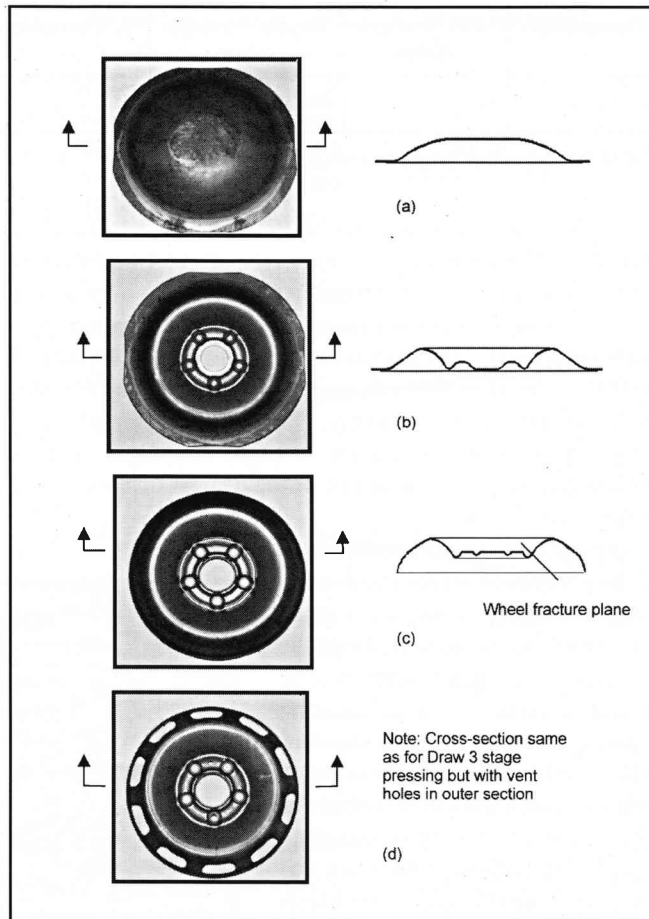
Production stages of a wheel; a) Draw 1 stage pressing; b) Draw 2 stage pressing; c) Draw 3 stage pressing; d) Venting stage
